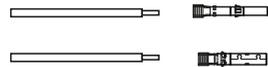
Insert the Wire into the Connector Cap nut and contact pin
